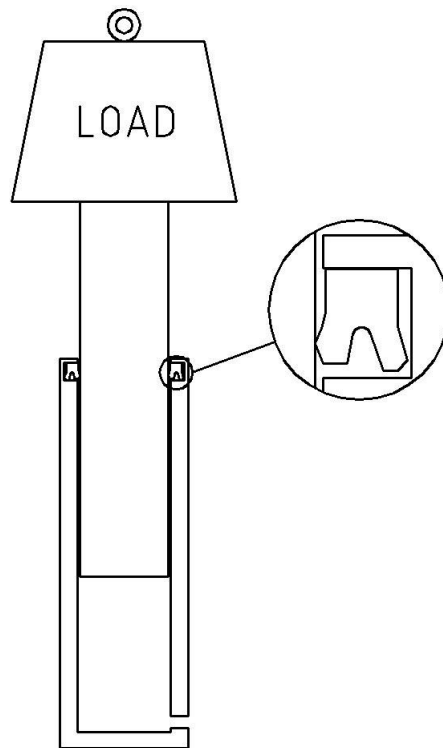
Hydraulic ram sectional view showing U-cup seal profile.
